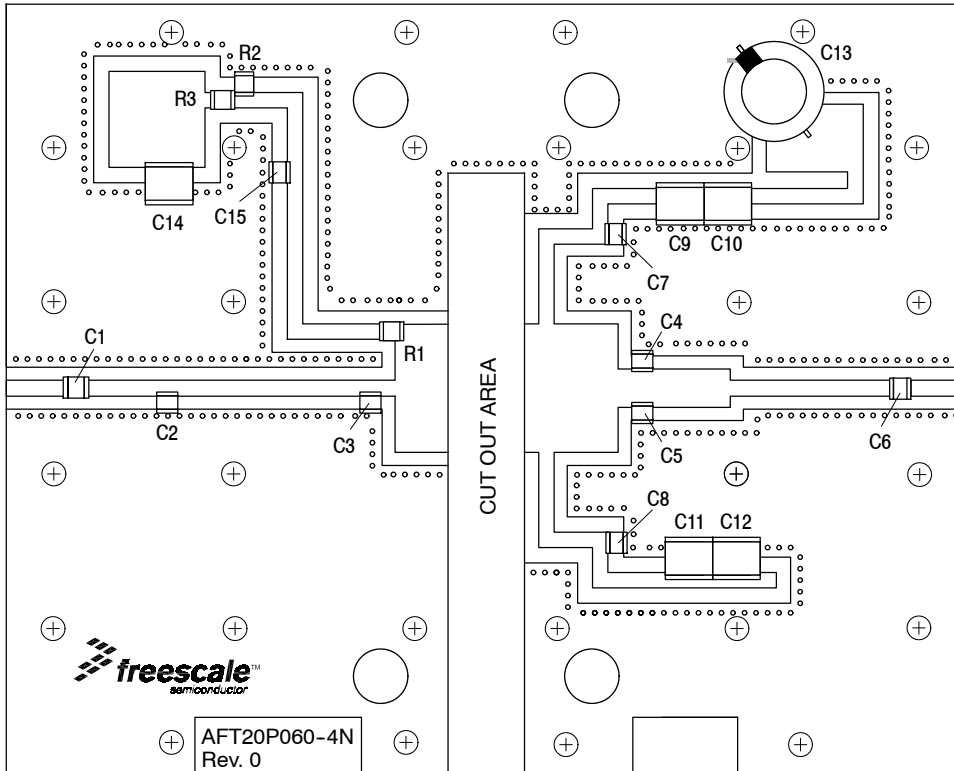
AFT20P060-4NR3 Test Circuit Component Layout — 2110–2170 MHz
